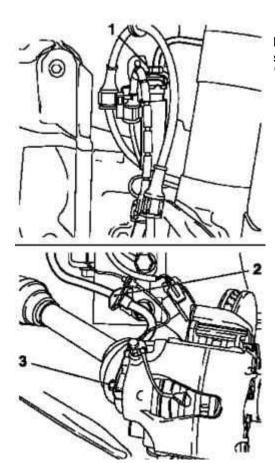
Disconnect the brake hose: 1 - tube of the braking system, 2 - strap, 3 - screw type "banjo"
